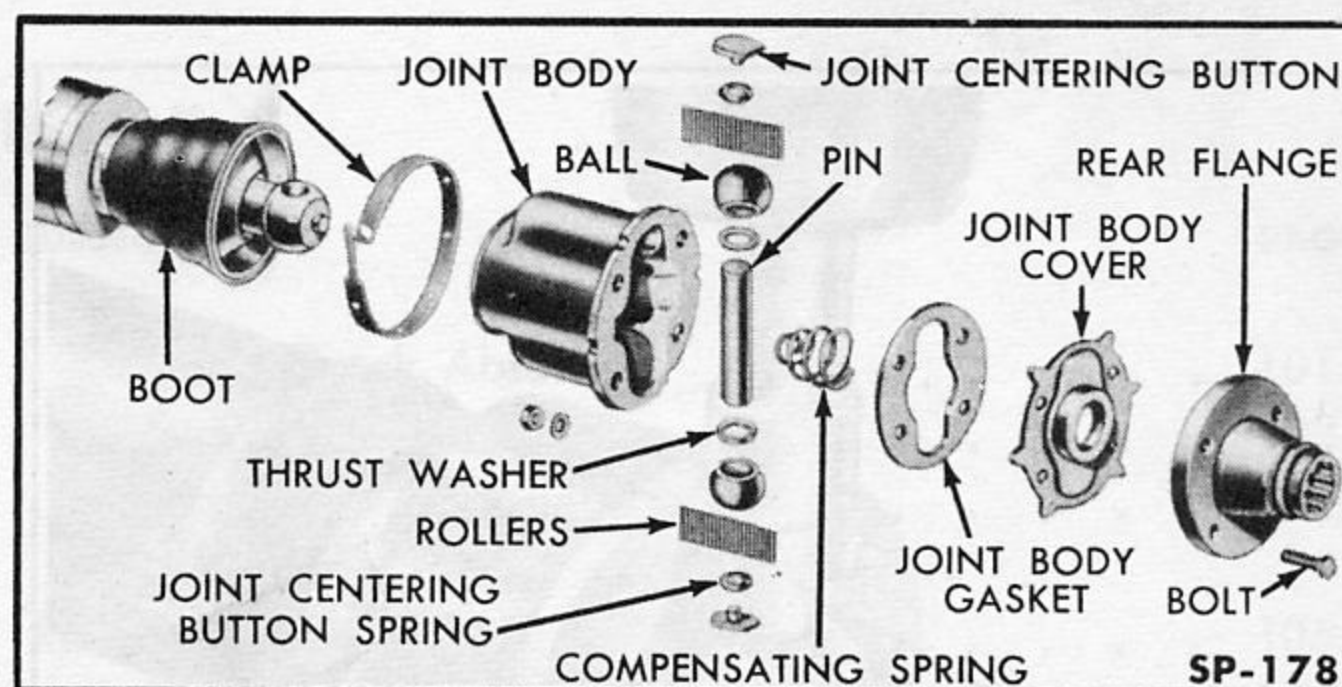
Ball and Trunnion Universal Joint—Exploded View
